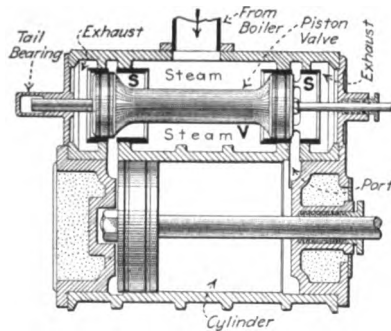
Section of cylinder with a piston valve. (Chandler and Taylor Company.)
